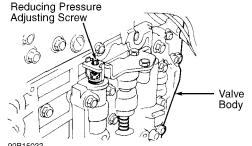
"O" Ring, Line Pressure & Reducing Pressure Adjusting Screw Courtesy of Mitsubishi Motor Sales of America.
